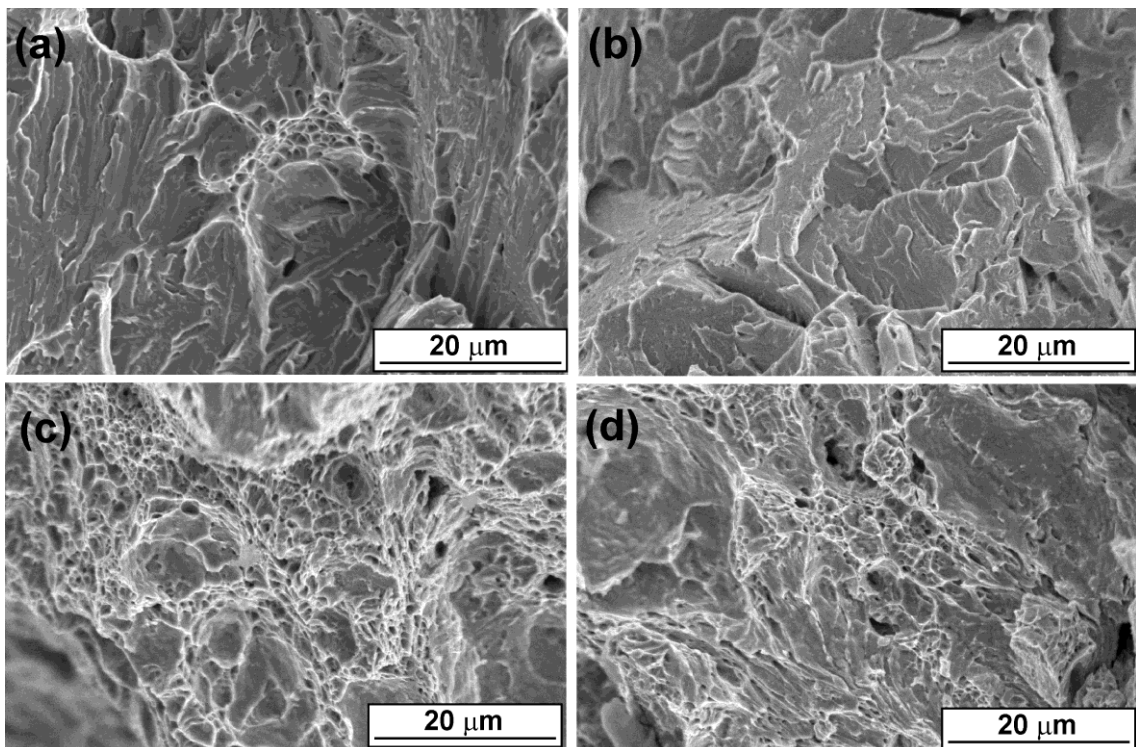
Fractographs of impact tested samples for 500 and 900 rpm conditions revealing cleavage fracture in as-welded state (a, b) and ductile fracture for PWDT condition (c, d) respectively.
